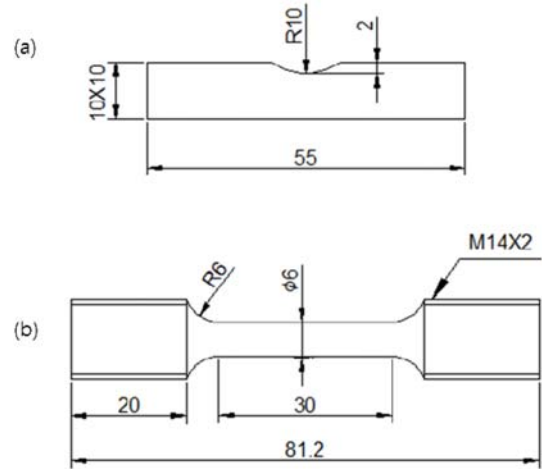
Shape and size of used specimens: (a) C-notched Charpy impact specimen and (b) tensile specimen(All dimensions in millimeters.).
